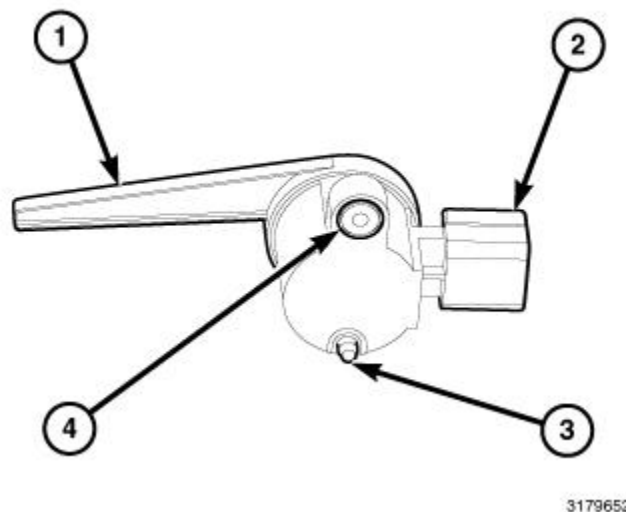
Spring-Loaded Mechanical Lever Arm, Pin, Mounting Tab & Receptacle
